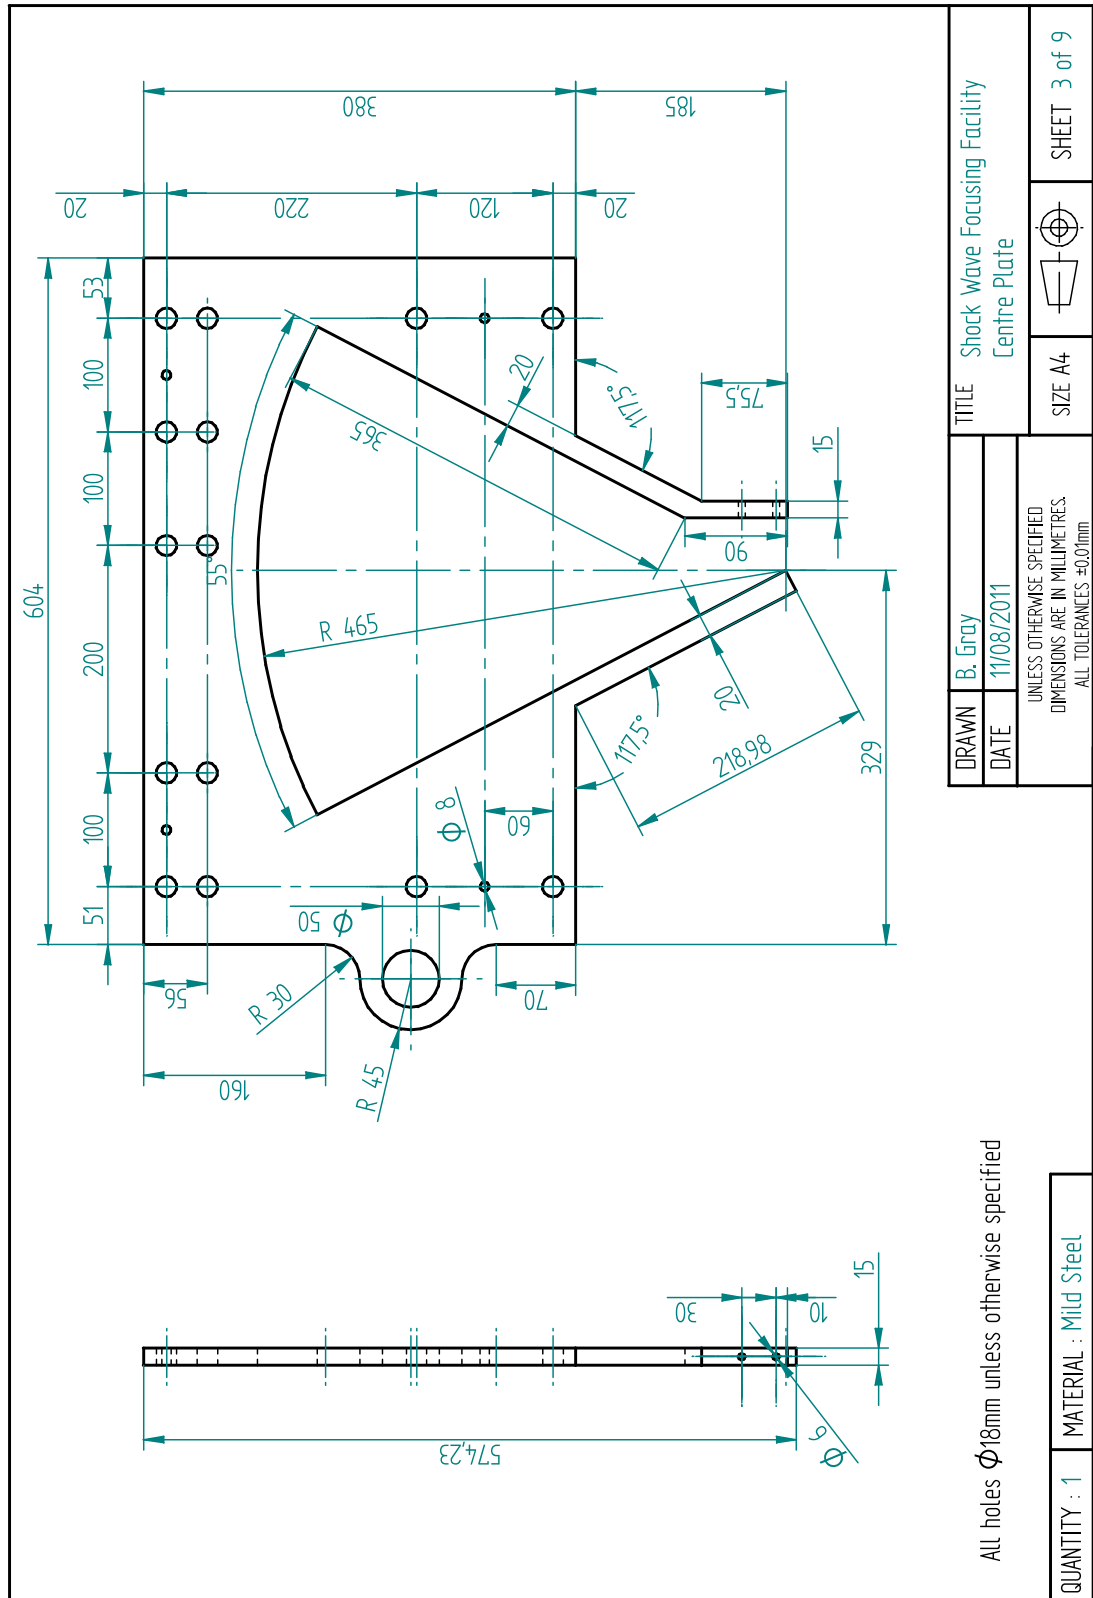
Engineering drawing of the propagation plate for a 450mm initial radius converging shock
